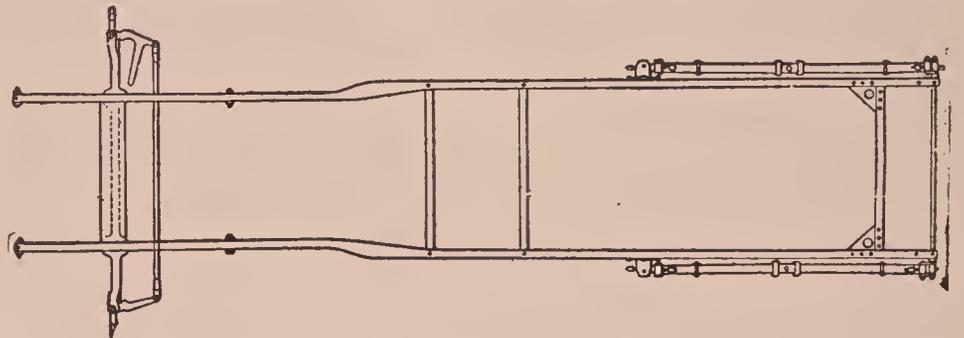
By taking out the motor and dashboard, the chassis is stripped right down to the frame, springs and front axle.
